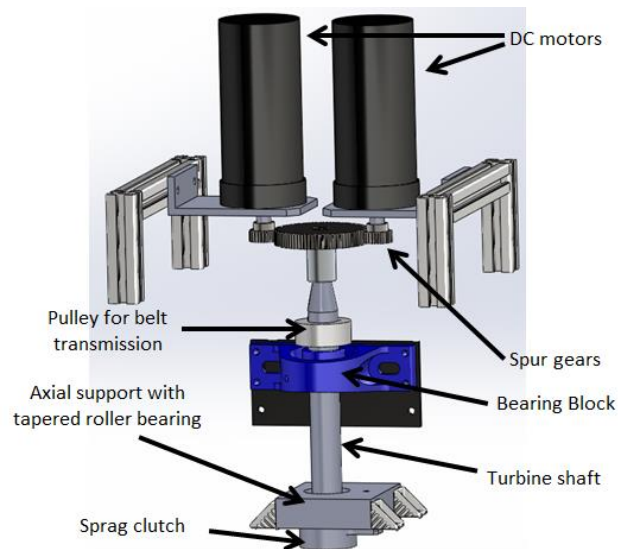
17: DC Motor Emulator and Main Driving Shaft Assembly
